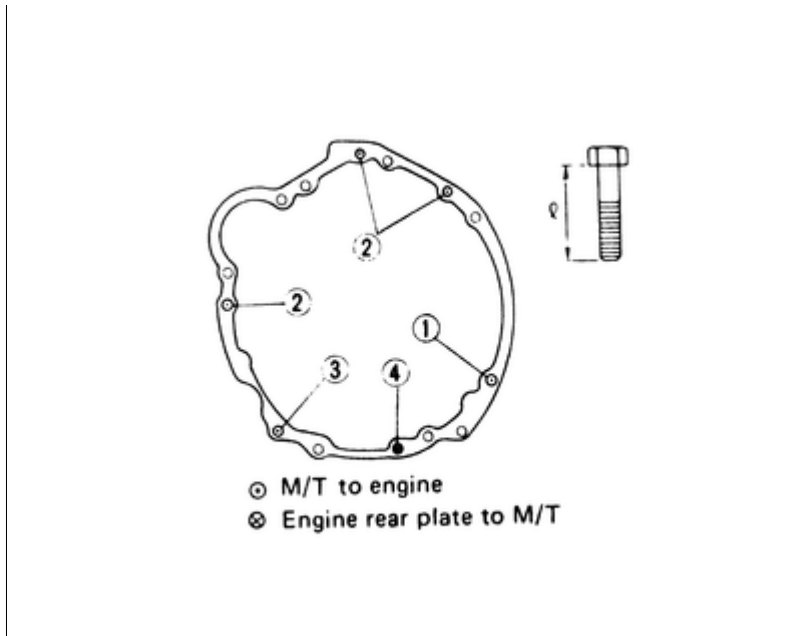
Transmission-to-engine bolt locations — 6-cylinder engines
